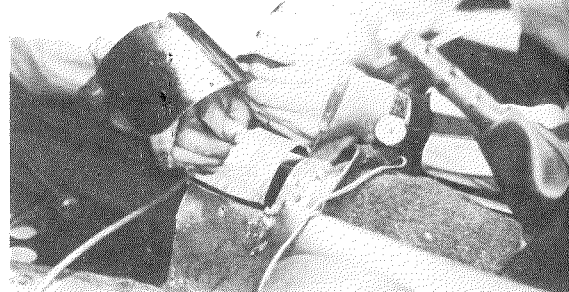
As the overdrive box is longer than the standard one, you'll need to cut out a section from the front of the propshaft tunnel. In hindsight we should have cut the section a couple of inches further back. After fitting the gearbox, fit a plate to cover over the propshaft bolt area for safety and to enable proper sealing against exhaust fumes.
